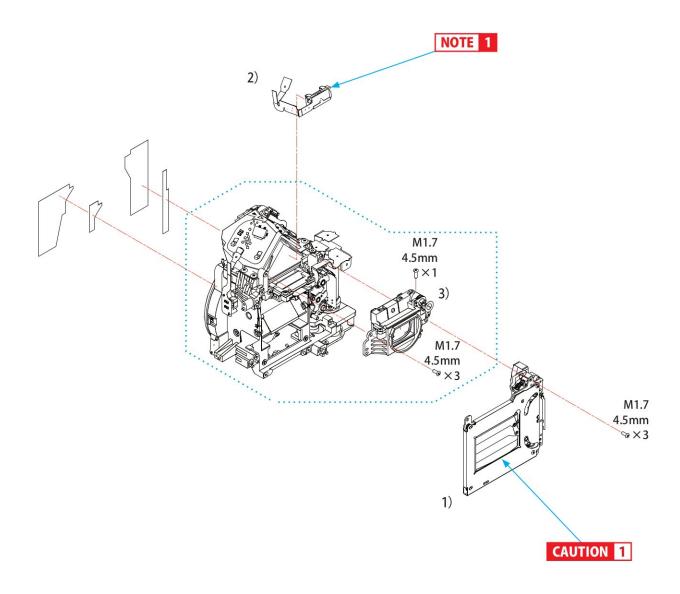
Shutter Ass'y / Auto Exposure FPC Ass'y / Eyepiece Ass'y Removal
